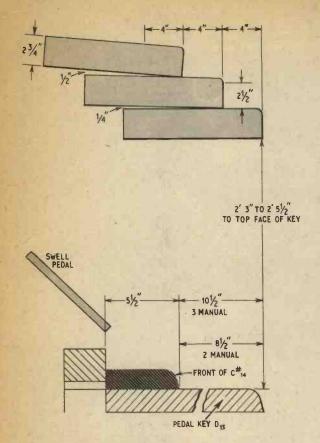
This sectional drawing shows the critical dimensions in a three manual console
